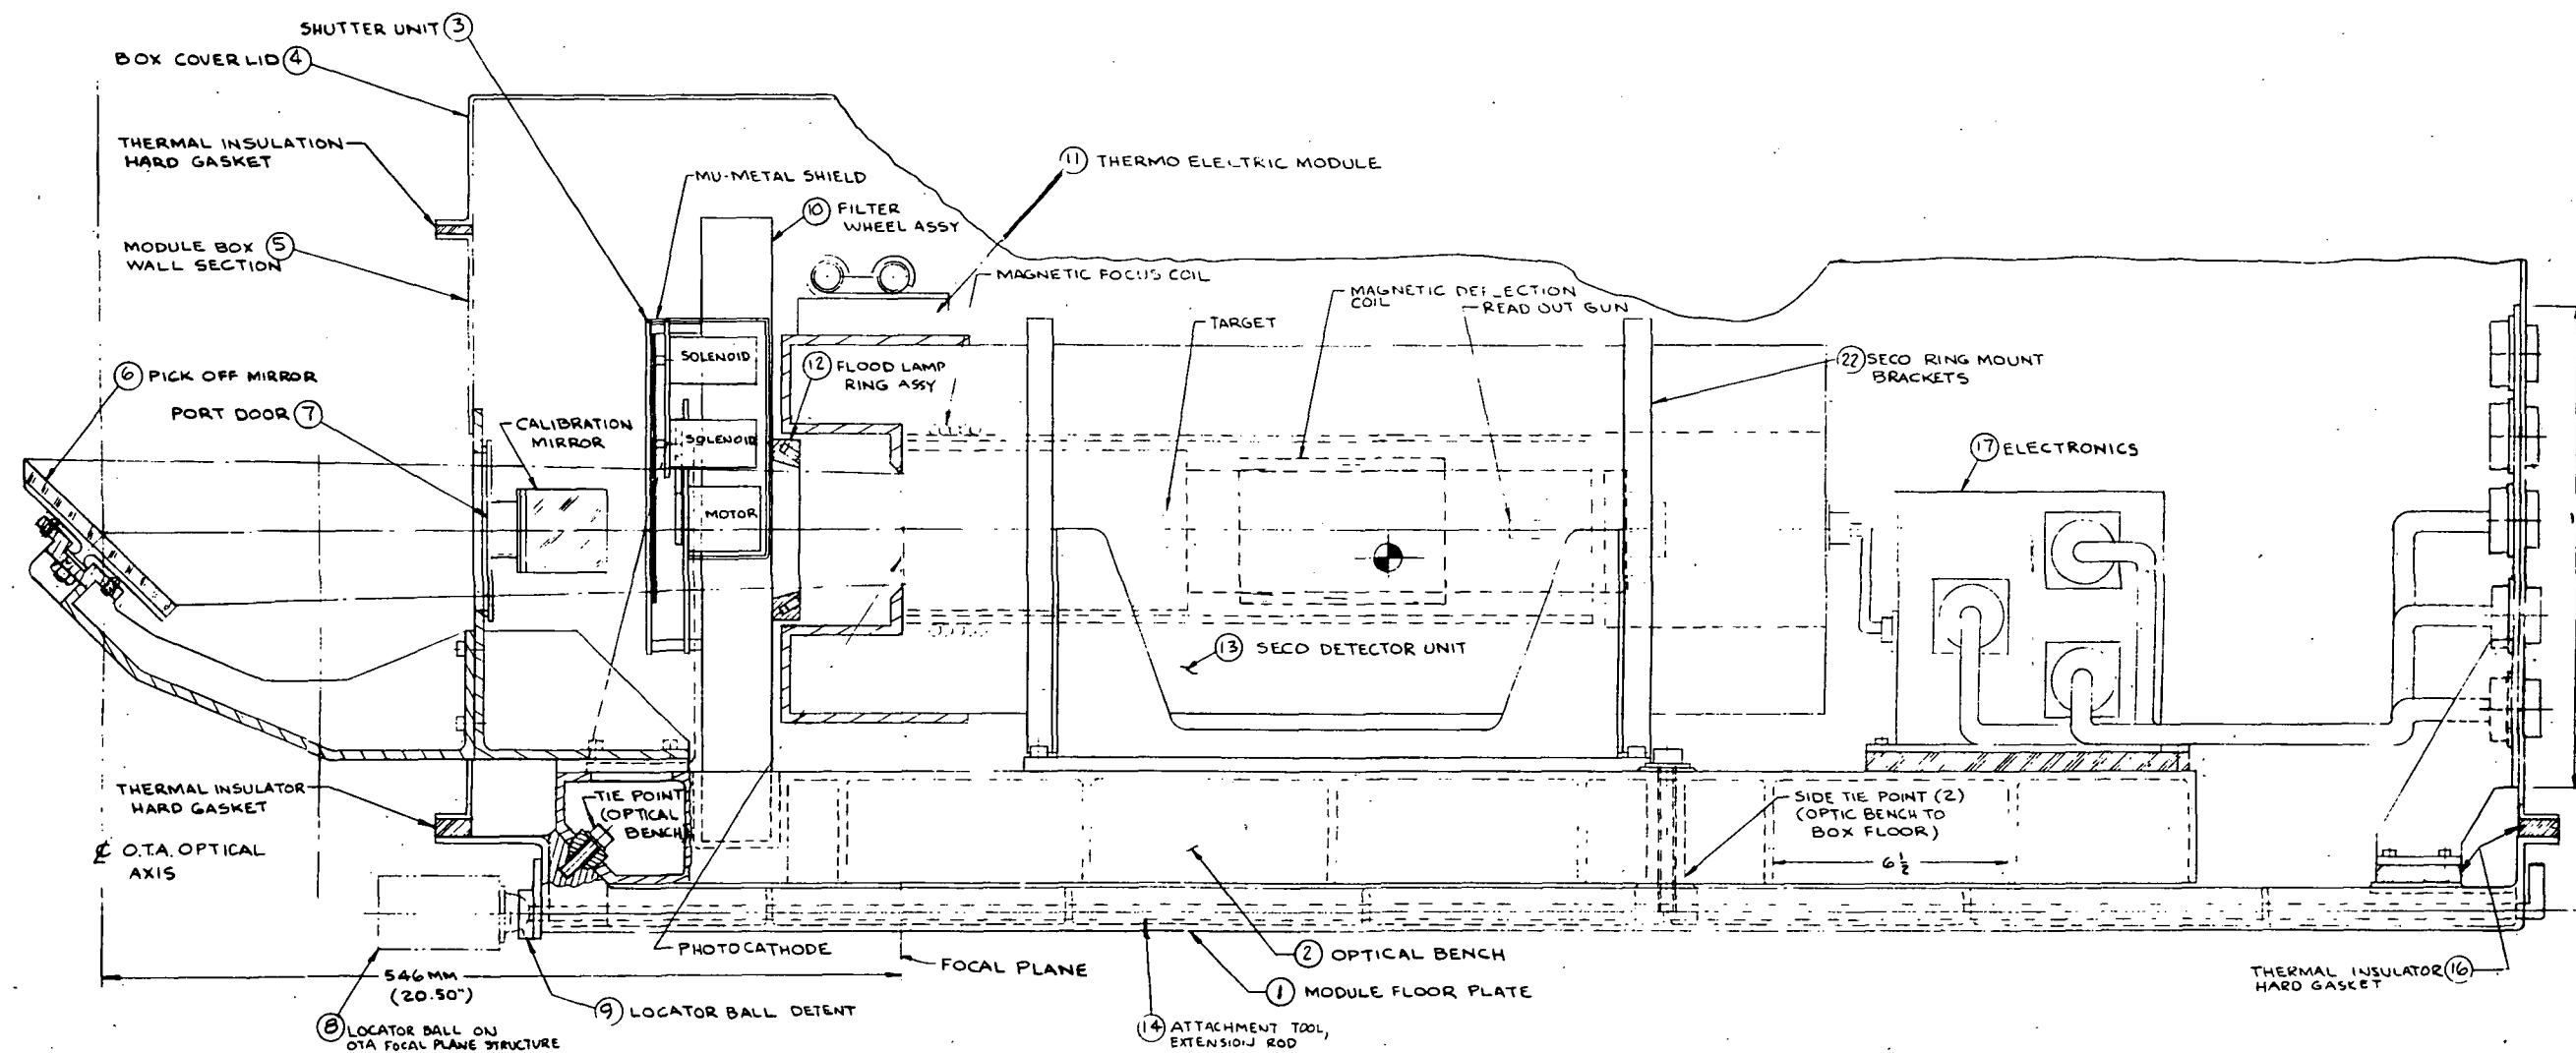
f/24 Camera Overall Layout - Sheet 2
